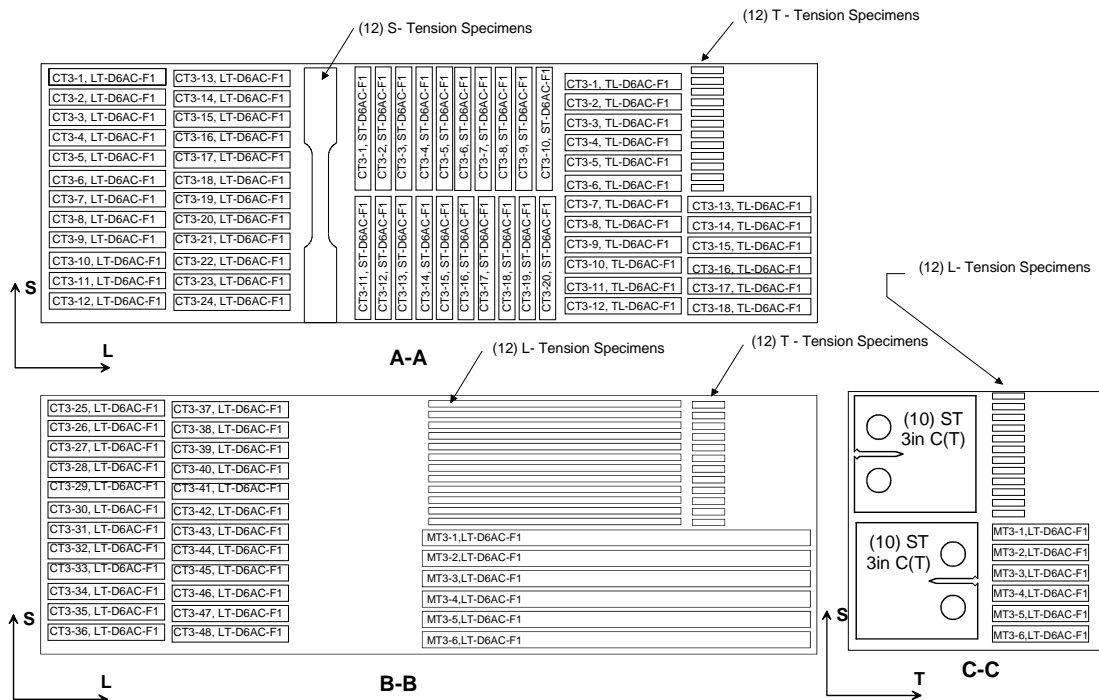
Numbering Layout for the Fracture and Tension Specimens
